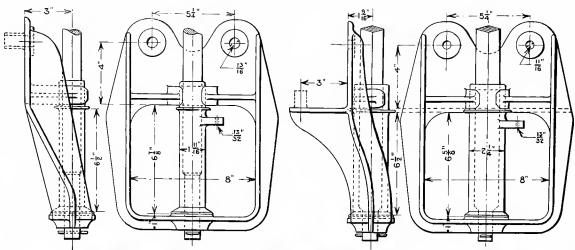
Malleable Iron Steps and Sleeves for Square or Round Brake Shafts.
